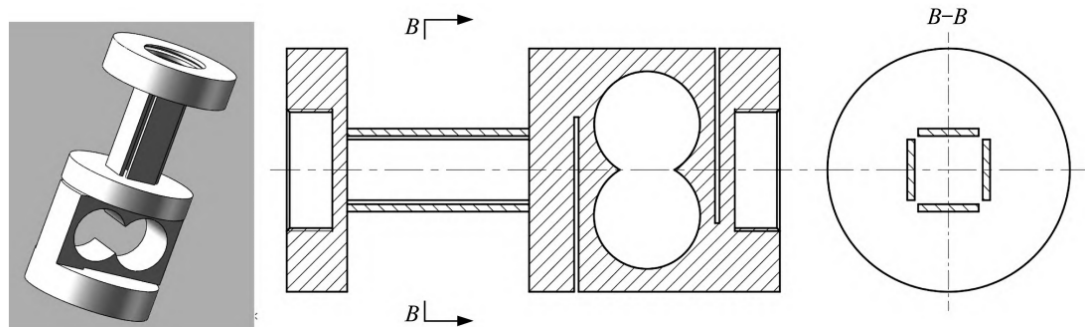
Cantilever type double hole parallel beam elastic structure<sup>[14]</sup>
